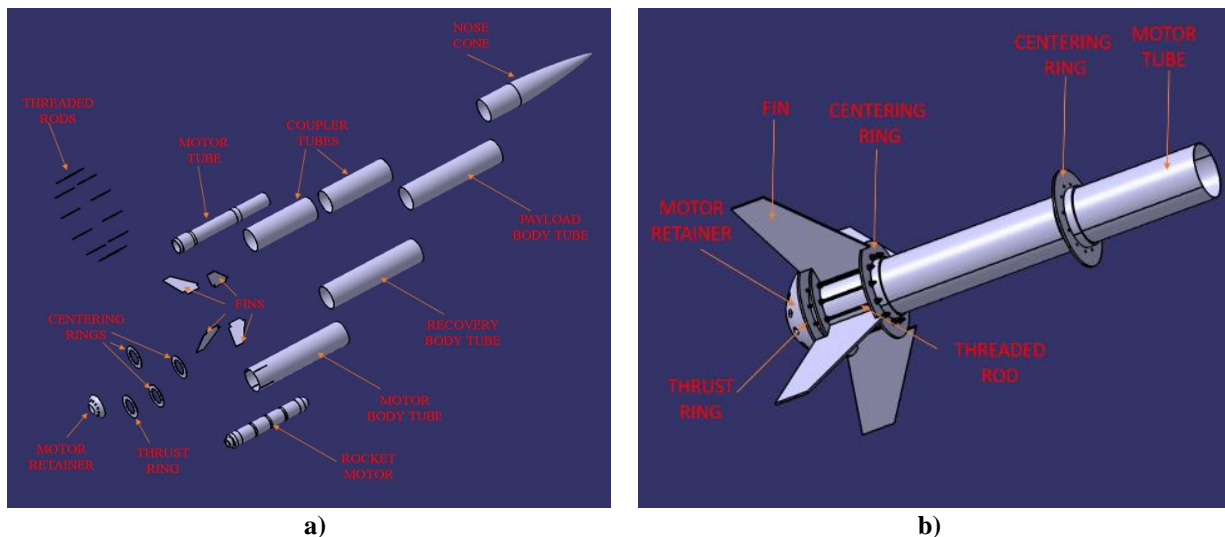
Detailed design view of the STEVE CAD assembly. a) Exploded view of the STEVE rocket assembly. b) Motor assembly.
